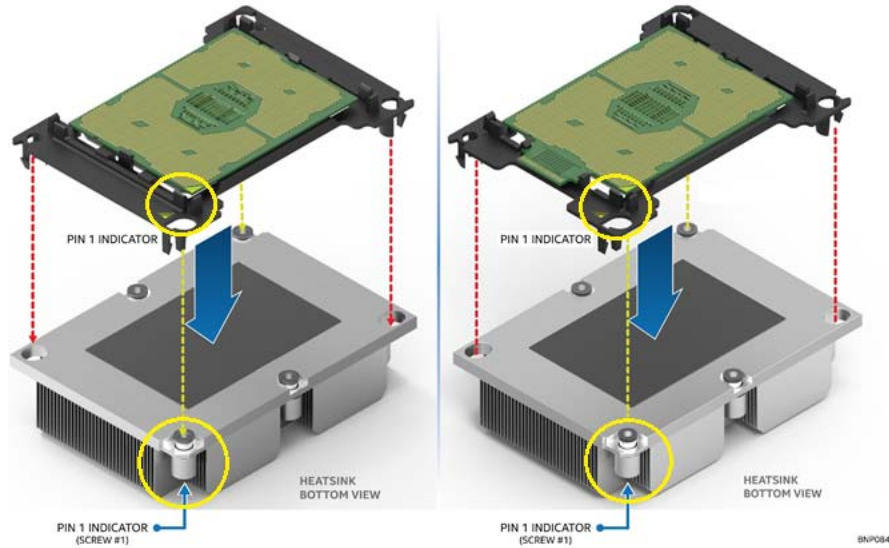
Processor Clip Sub-assembly to Heat Sink Orientation
